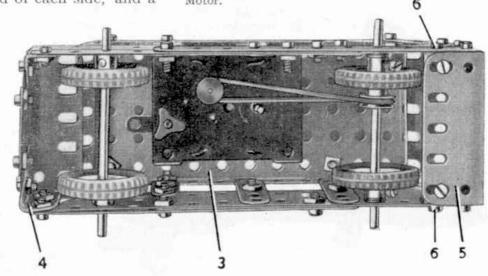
This picture of the Motor Coach shows how the Magic Motor is connected to the rear wheels.
